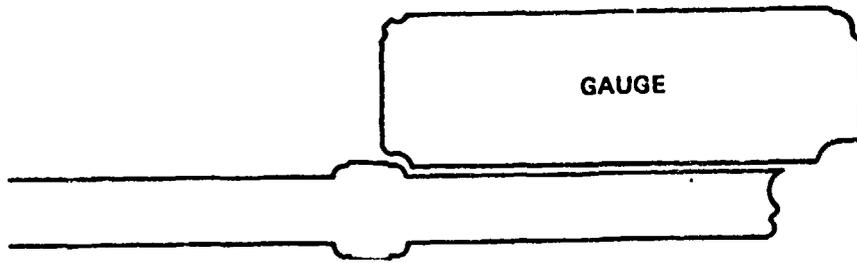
A GAUGE FOR MEASURING WELD REINFORCEMENT
